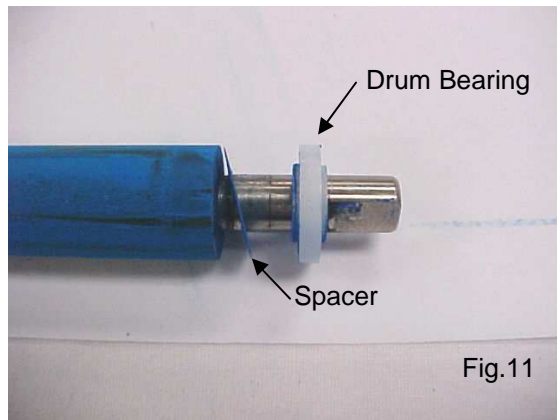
Developer roller configuration. Clean the developer roller, drum bearings, and spacers thoroughly with compressed air and a lint free cloth.
